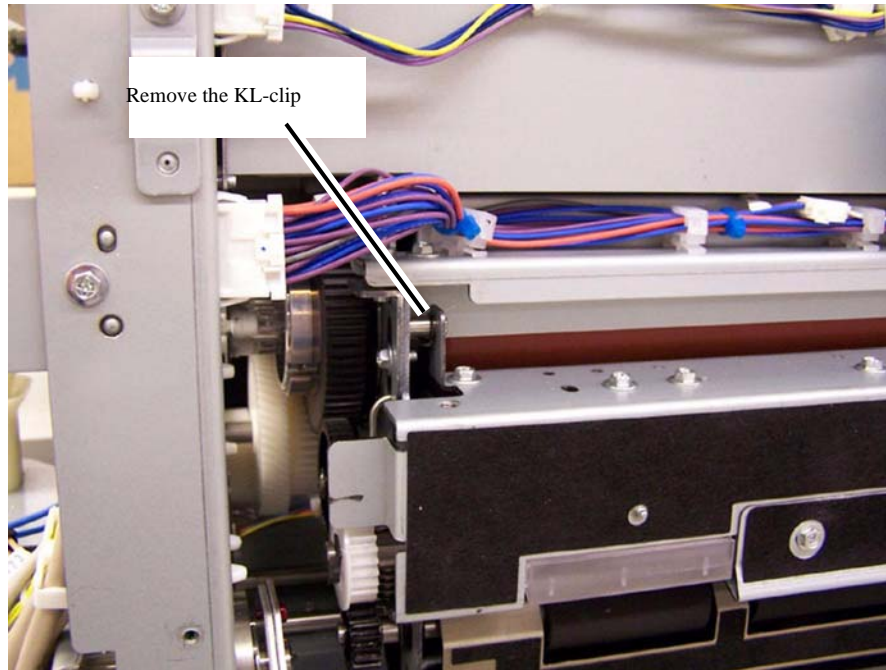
KL-clip location is on the pivot pin at the right rear of the Printer
